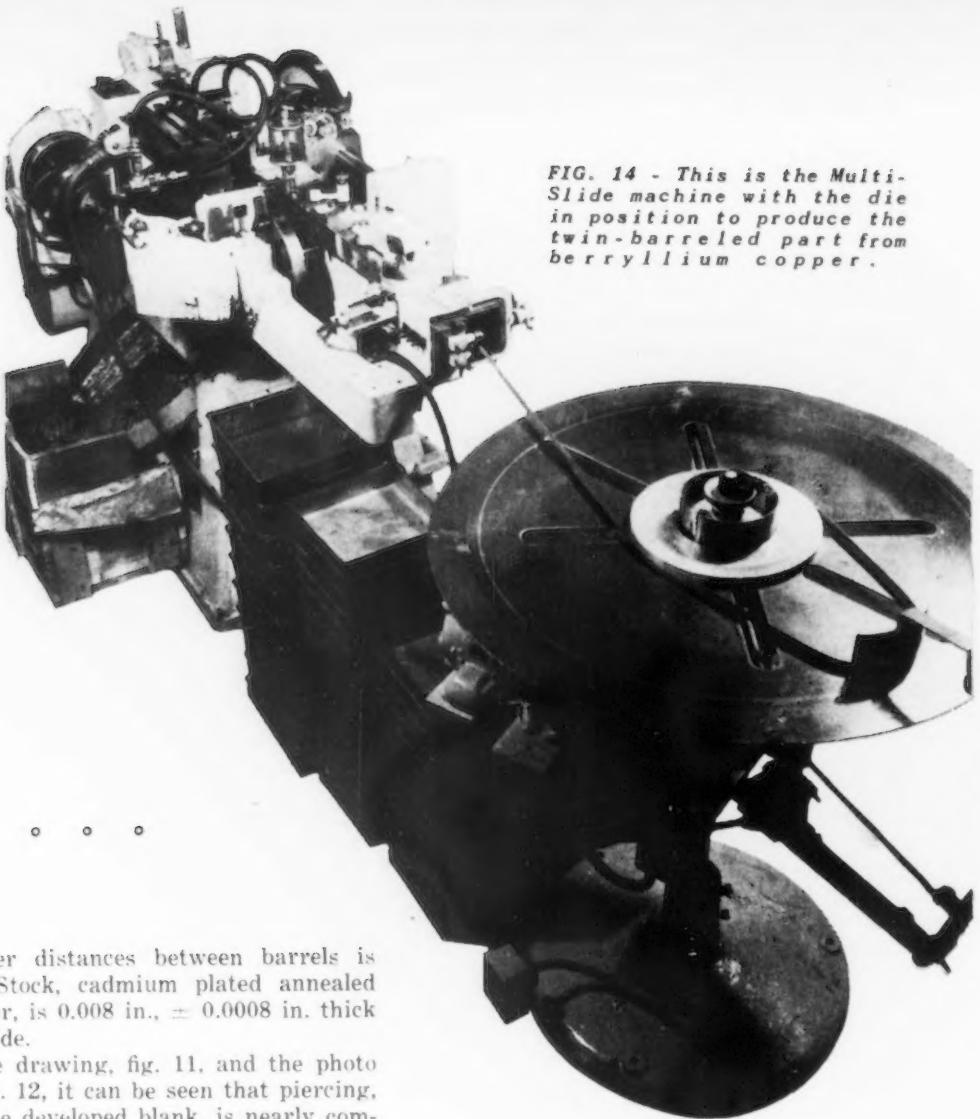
This is the Multi-Slide machine with the die in position to produce the twin-barreled part from beryllium copper.
